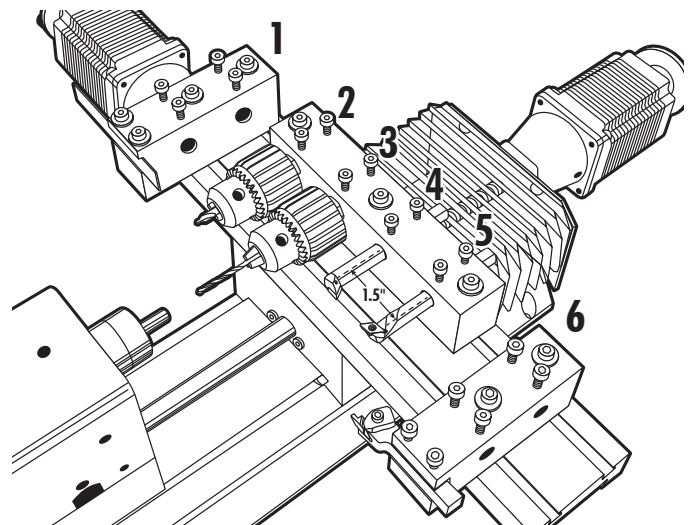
The distance between the two cutting tips of these boring bars (#4 and #5) is enough to allow backside clearance when either tool is cutting so they don't interfere with the part when the other tool is cutting. Each hole on the 3/8" Gang-tooling tool post (P/N 5930) is 1.5" on center.
